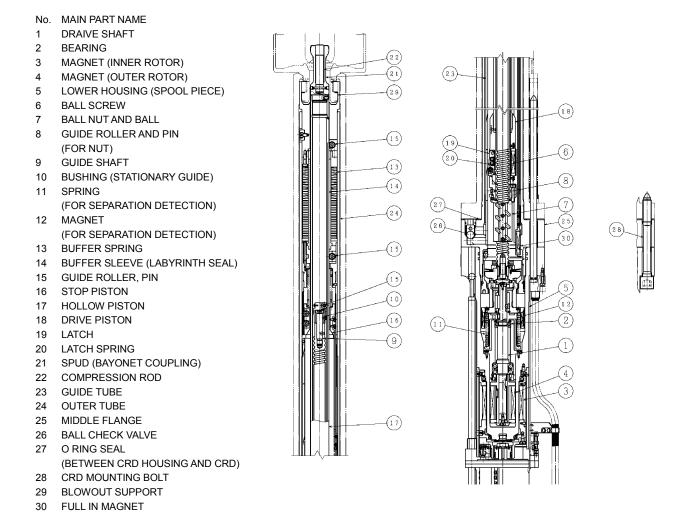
Fine Motion Control Rod Drive Unit (Cutaway)
